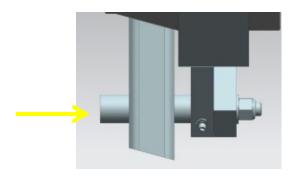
Slide Clamp Ring Pivot Pin through Hole
